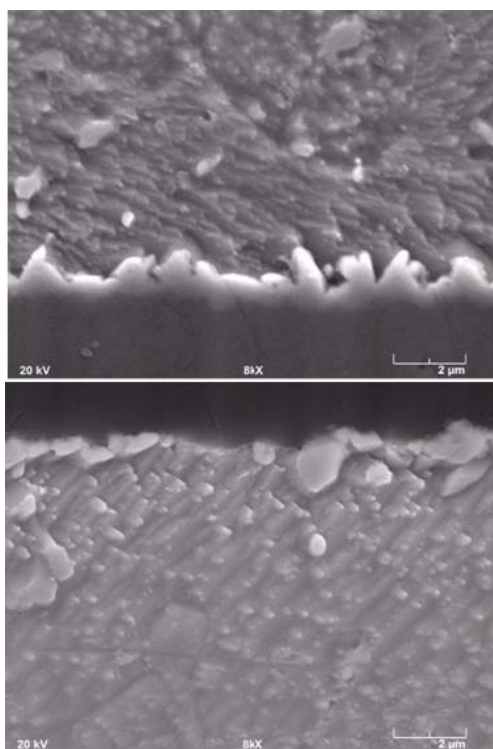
SEM images (8000X) of cross-section (top) and fractured surface on solder side (bottom) for SAC105 solder joint.
